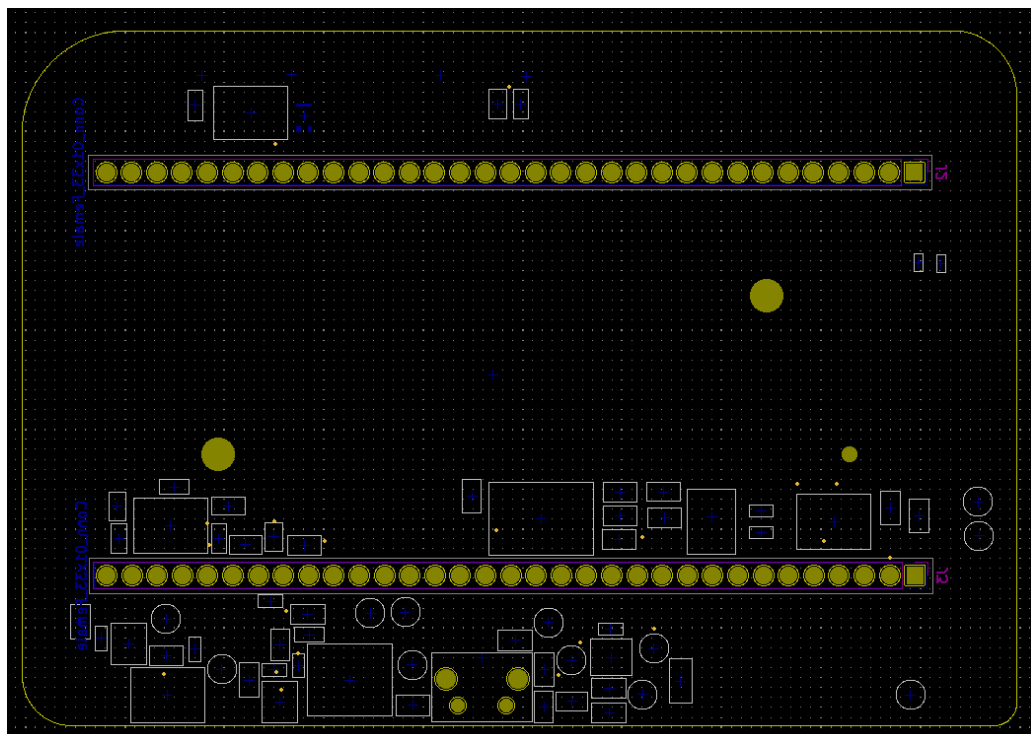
Screenshot Of the Front Copper Layer of the PCB
